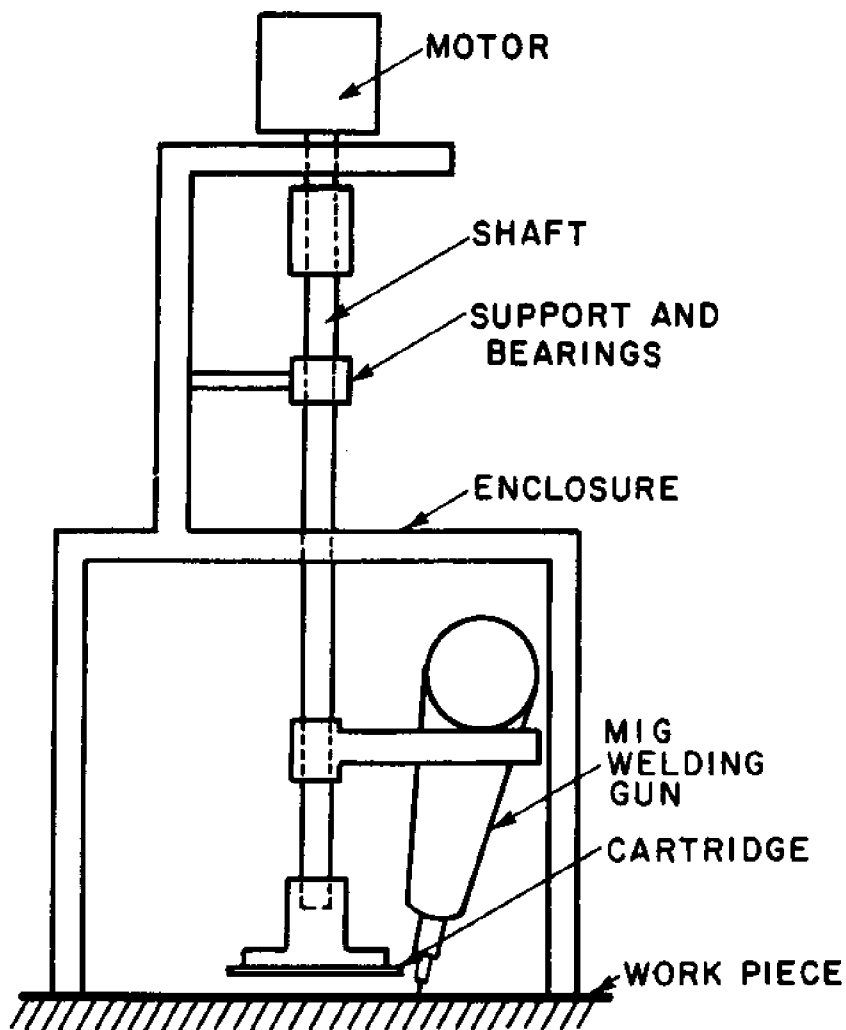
A device capable of welding a circular patch to a flat plate developed by Gustin[T21, P25]
